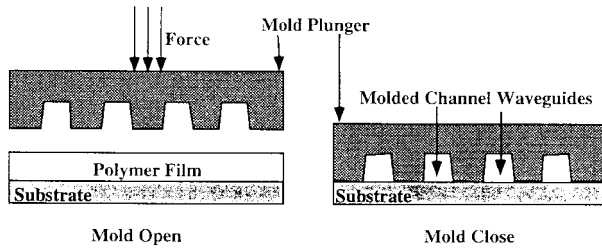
Schematic of the two-piece compression-molding technique for fabricating 3-D tapered waveguides.
